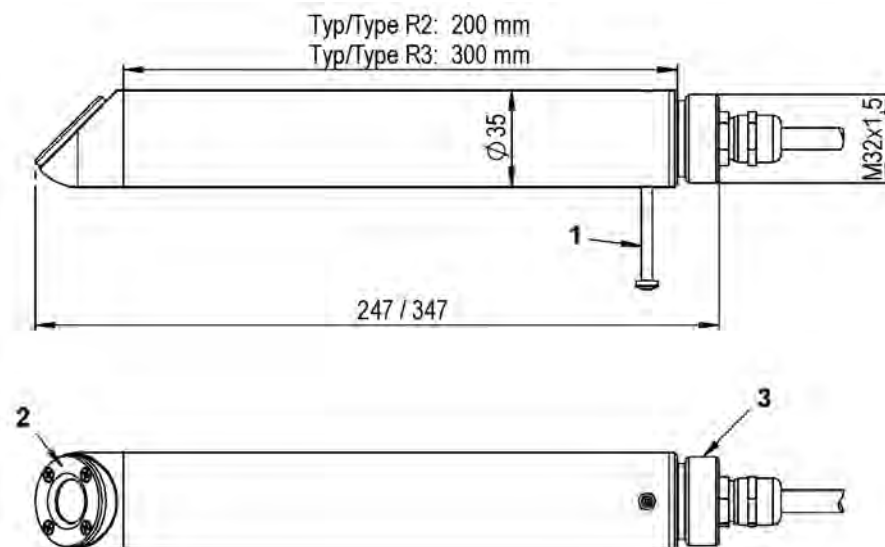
Dimensioned drawing plug-in sensor Type NOS-V2S
